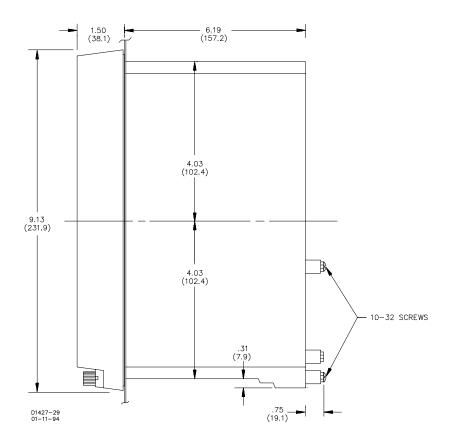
S1 Case, Single-Ended, Semi-Flush Mounting, Outline Dimensions, Side View
